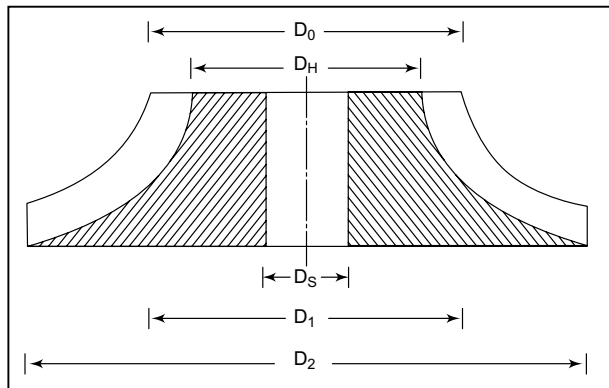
Definition sketch for determining the dimensions of different components of an impeller
